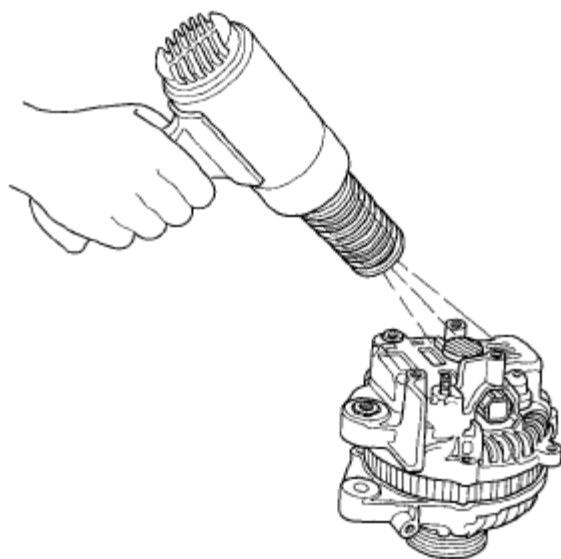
Identifying Heat Rear Bearing Seat With Heat Gun
